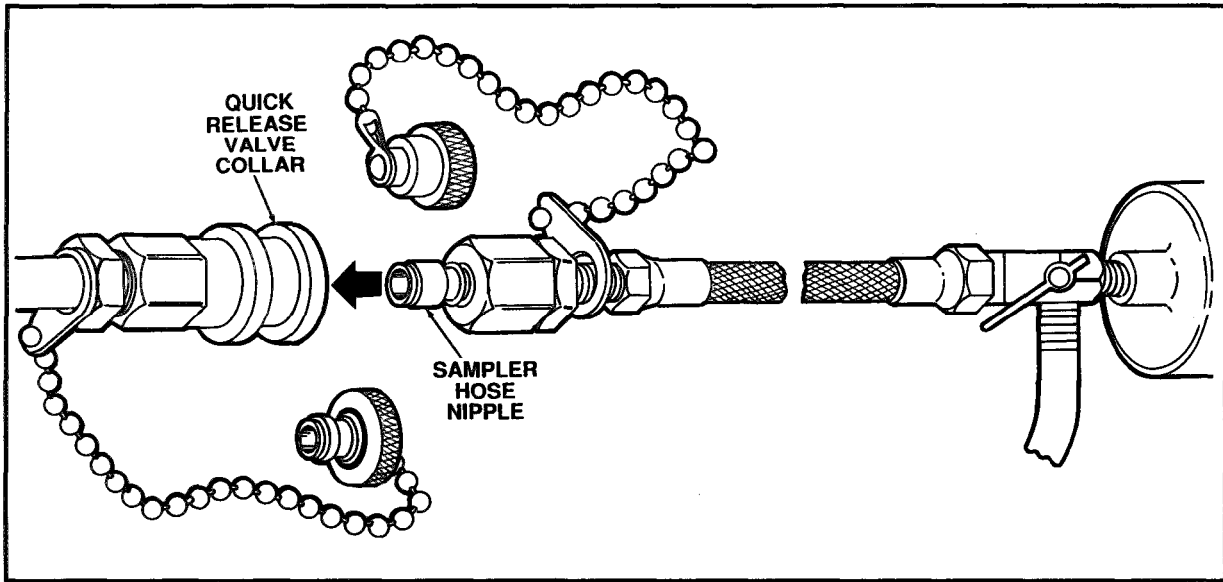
Inserting Sampler Hose Nipple into Sample Valve Collar
